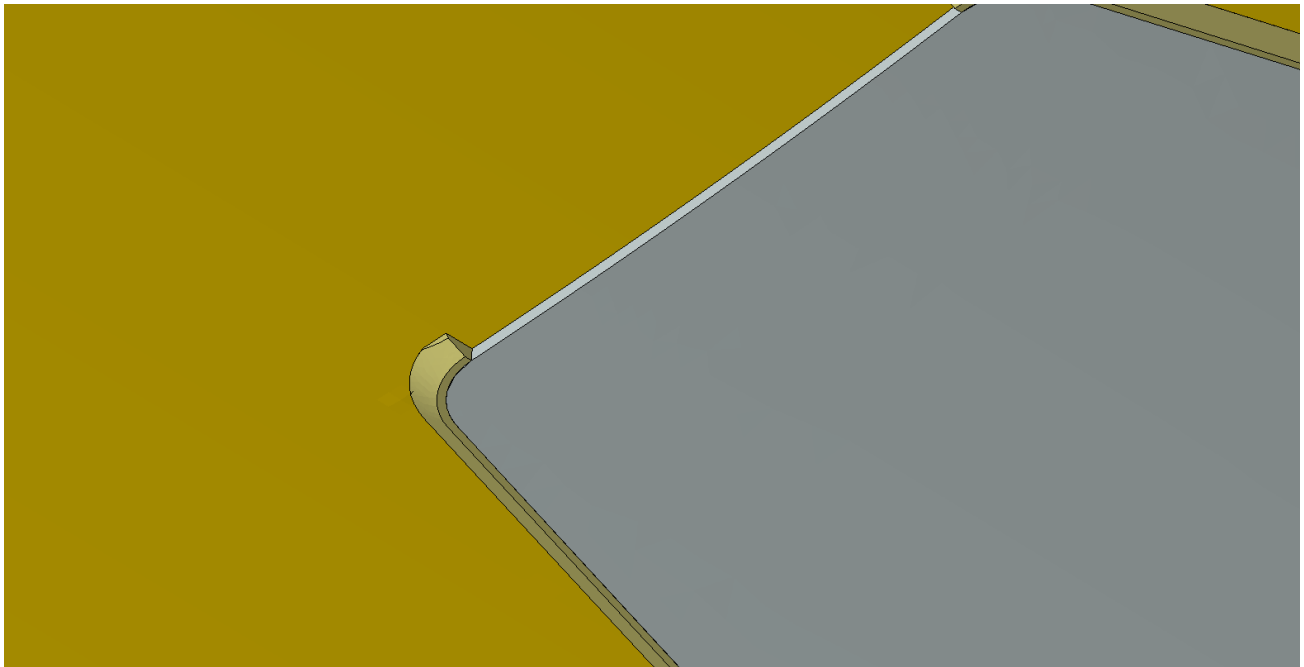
Weld geometry near the cradle pad nose, wrap-around weld case.
